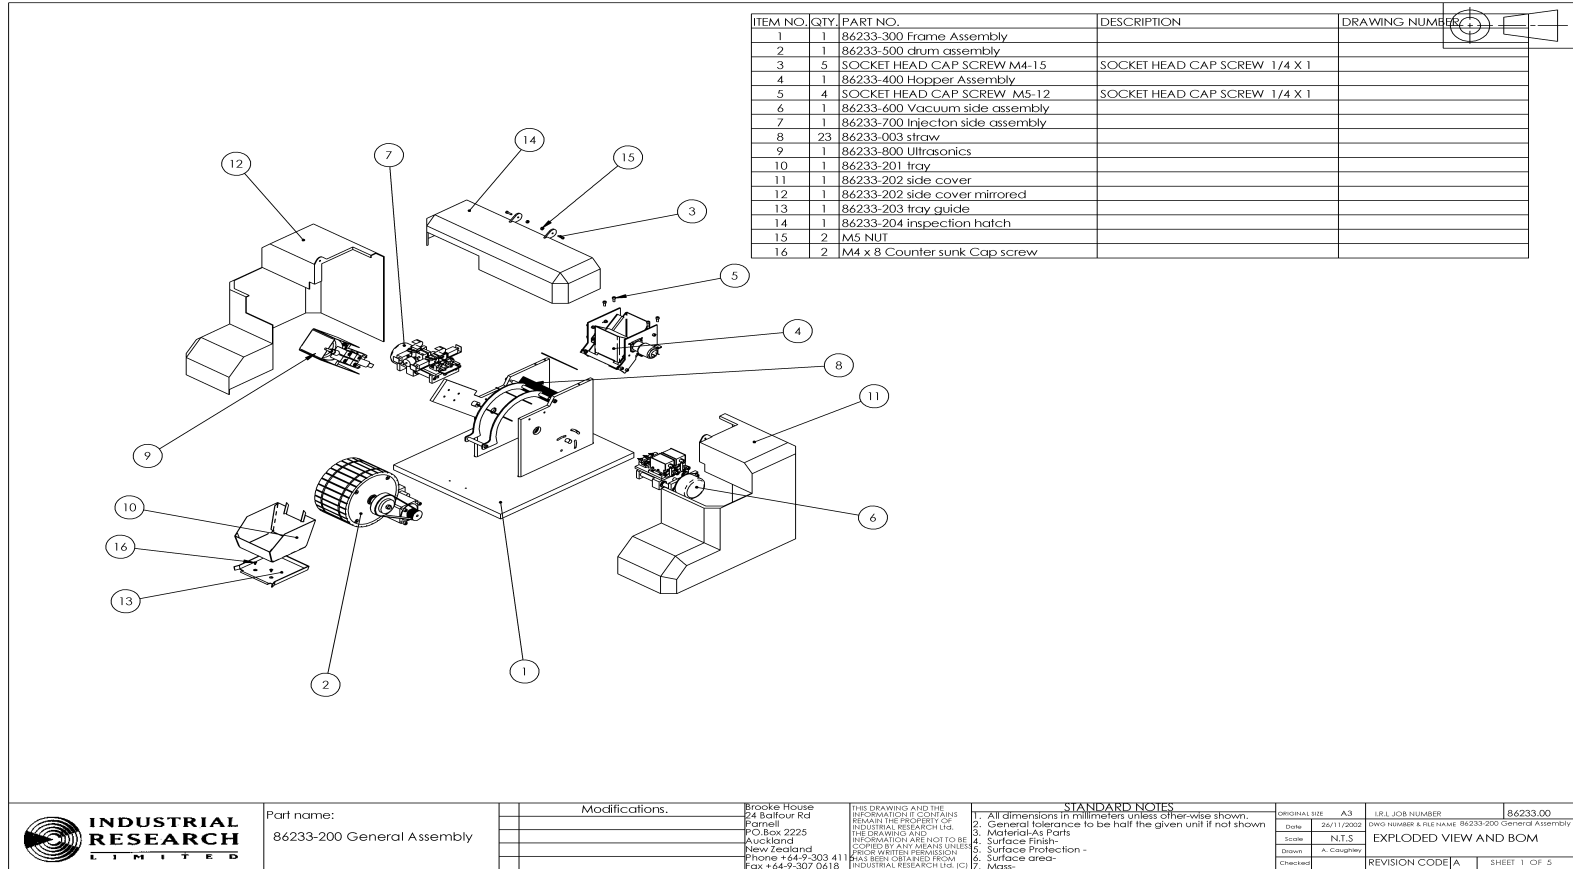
KNEX machine, exploded view of hopper, straw transport, injection and vacuum carriages
